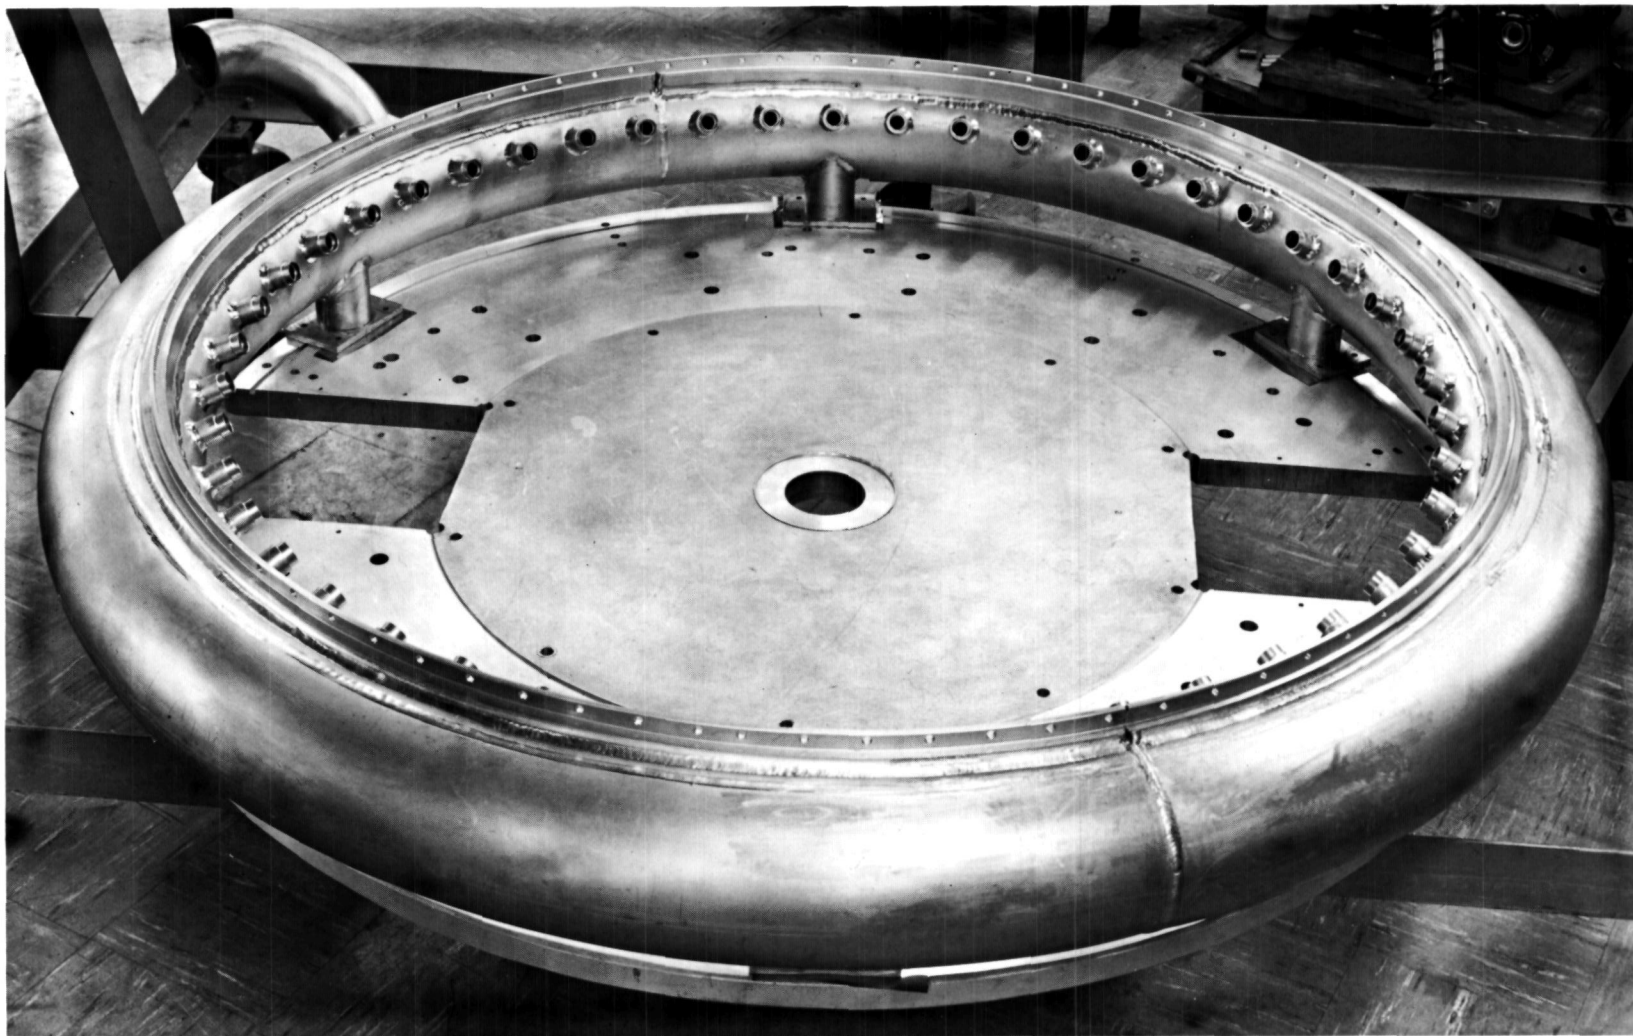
Outlet Manifold Prepared for Gas System Assembly. (P69-9-10B)
